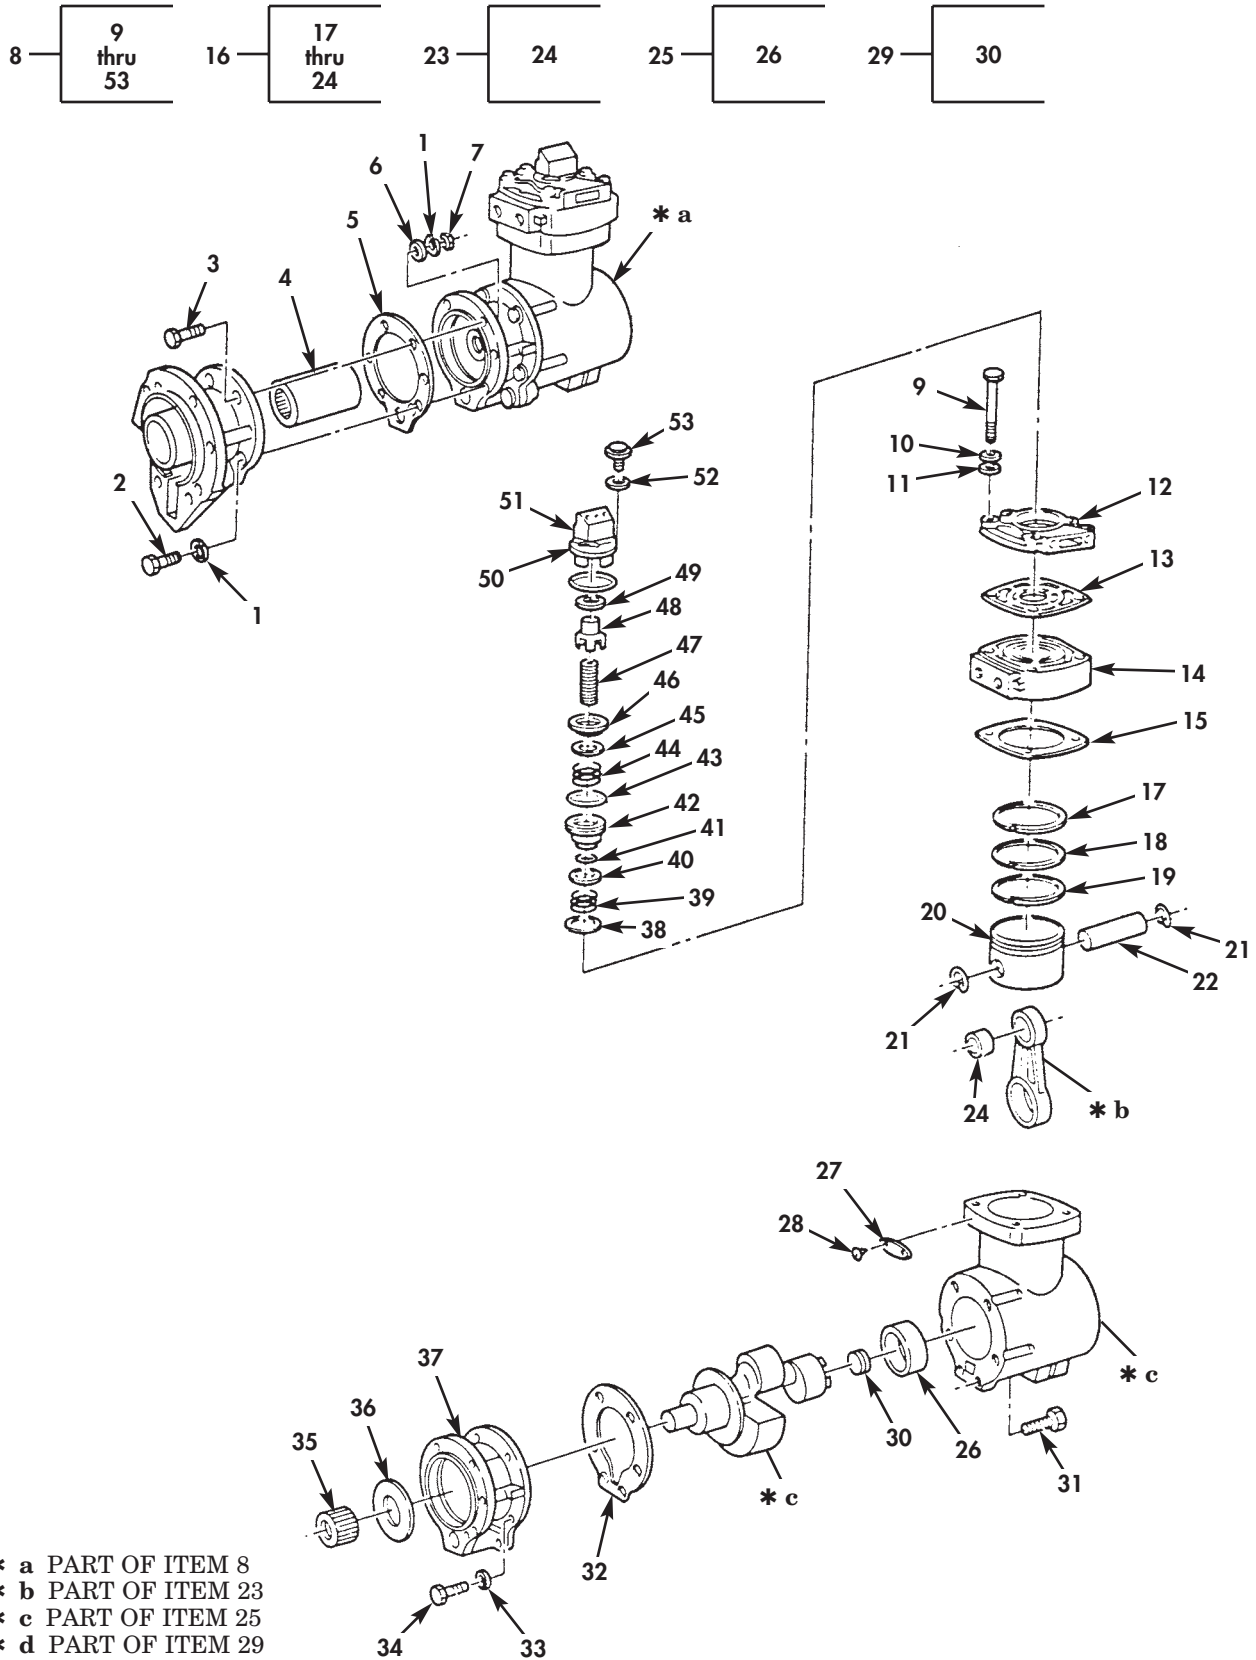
Air Compressor and Governor Assembly (Sheet 1 of 2).
